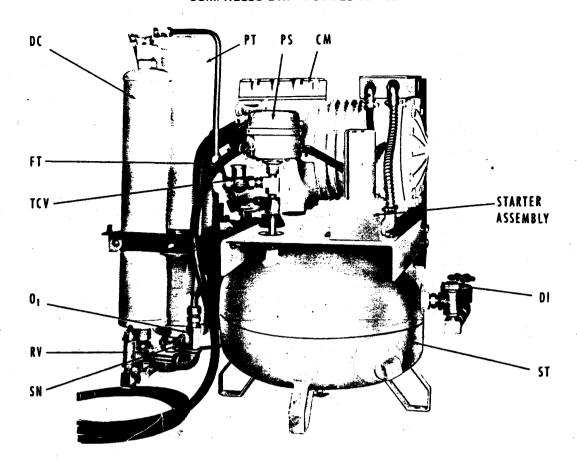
REAR VIEW-WITH COVER REMOVED
